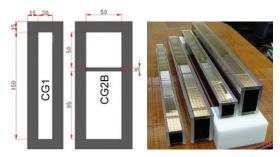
The CG1 and CG2B neutron guide crosssection dimensions (mm) and its actual pictures.
